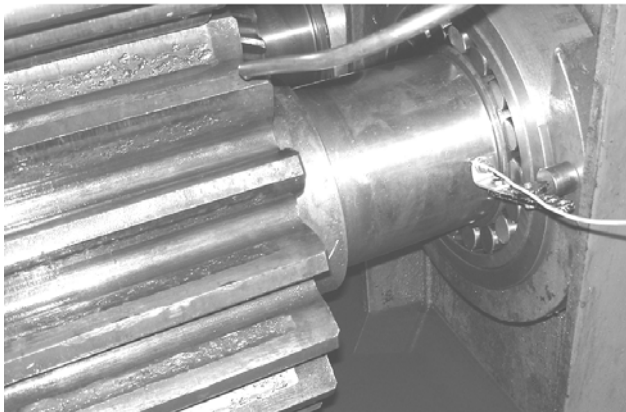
The damaged z_3 teeth and vibration displacement measurement sensor
